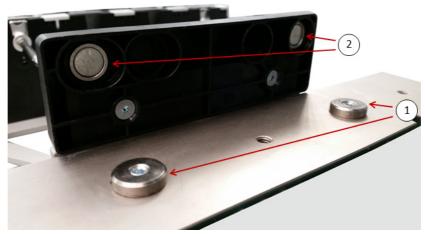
Magnetic foot mountings on the MSR O-INSPECT
